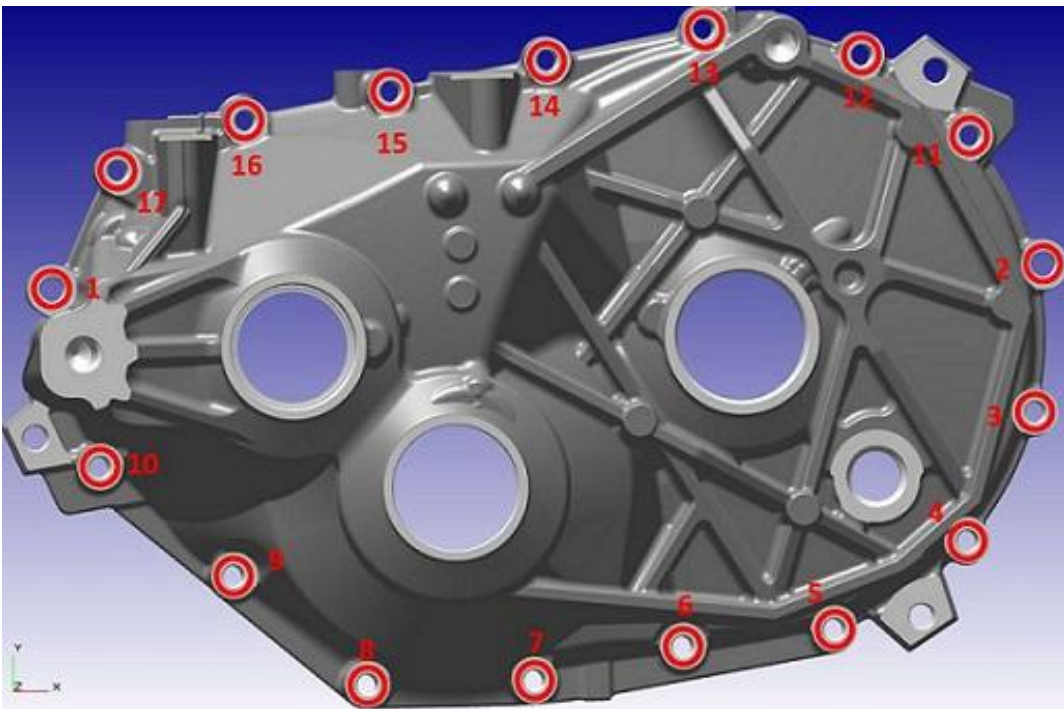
Installing the multi-point socket head bolts; tightening torque 20 Nm + 90°.
